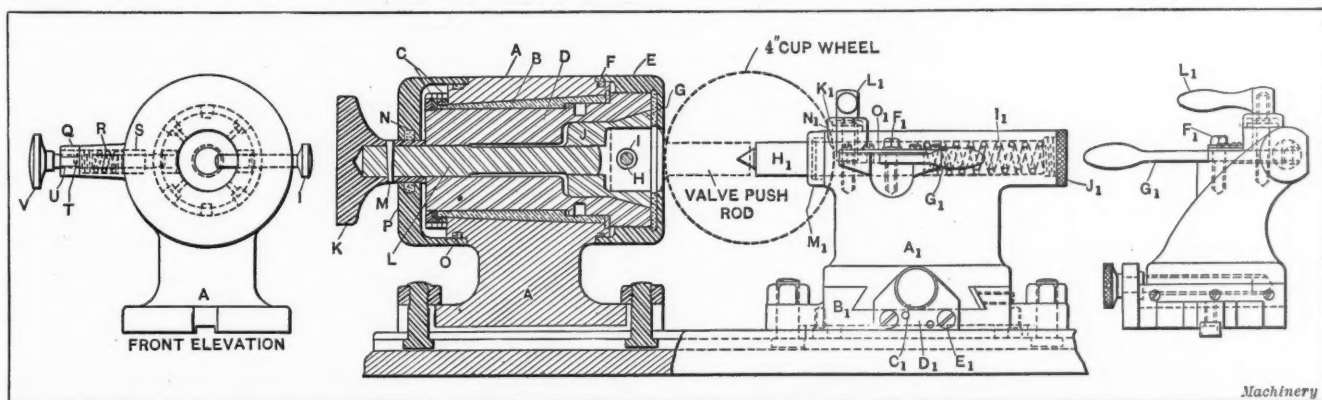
Fixture used in Grinding the Square Body of the Valve Push-rod shown in Fig. 1
